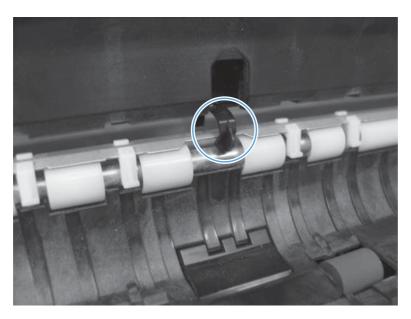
Remove the cassette pickup drive assembly (4 of x)
